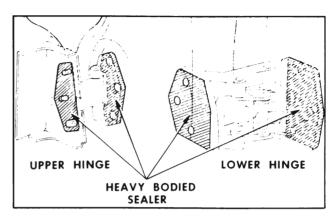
Rear Door Hinge Anti-Squeak and Sealing
